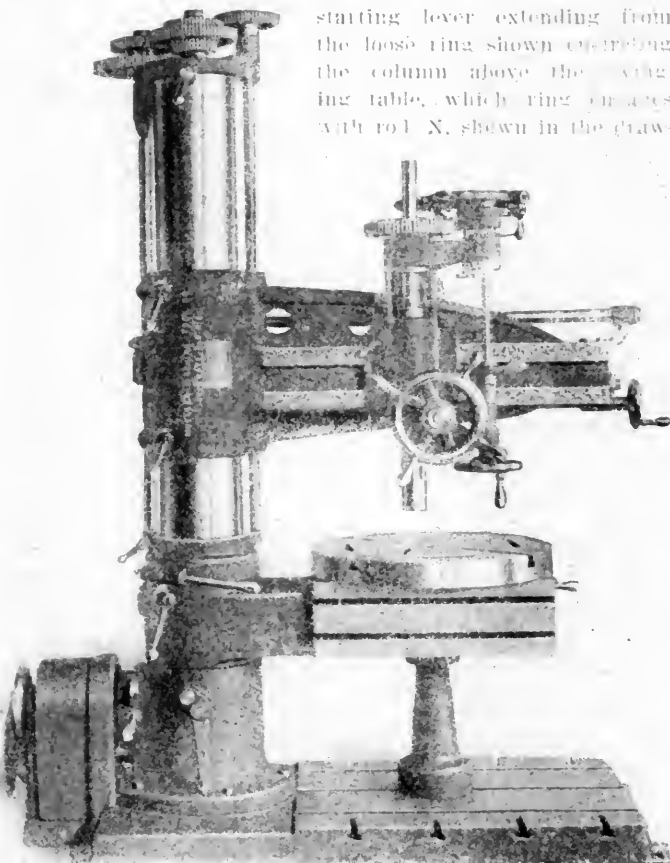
GENERAL VIEW OF THE MUELLER RADIAL DRILL.
